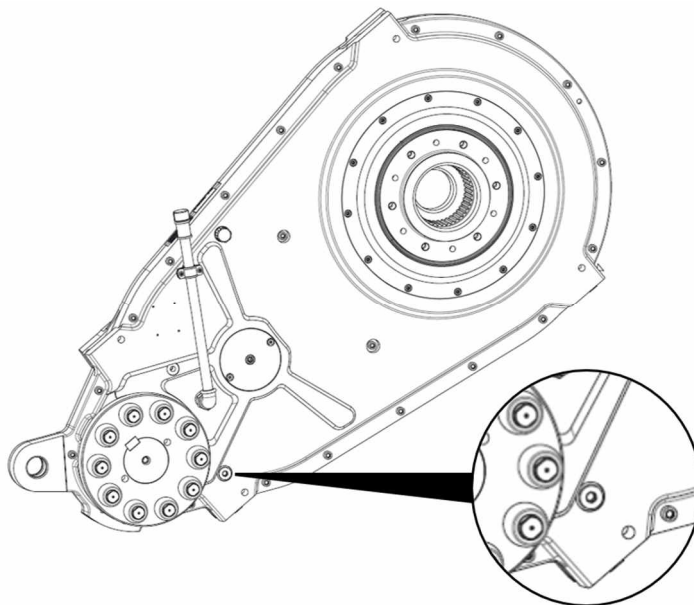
Oil drain screw – installation angle 25,6° to 38,2°
